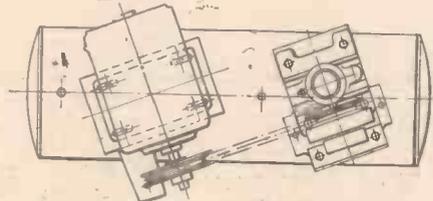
General plan showing 1/2 h.p. motor in position.
